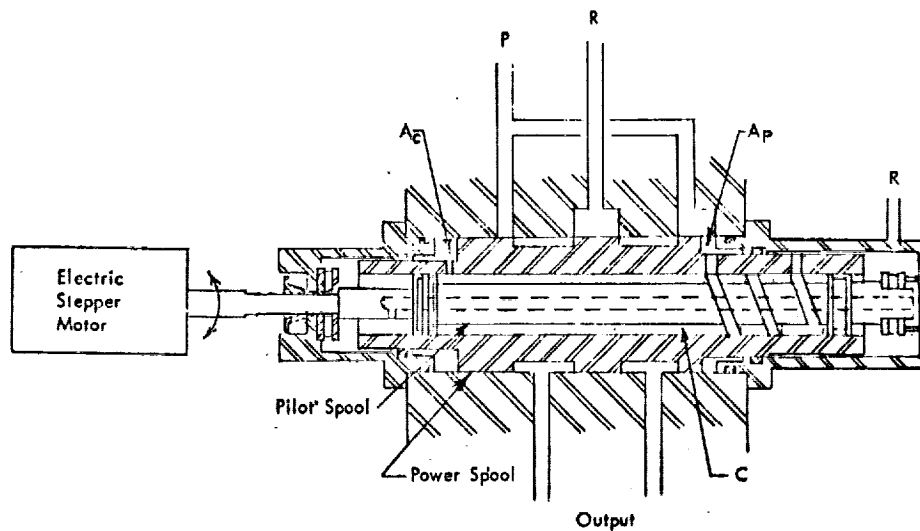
TWO STAGE STEPPER MOTOR VALVE
